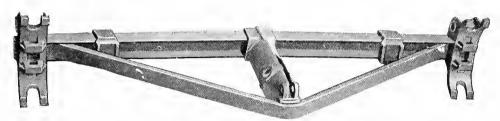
Huntoon Standard Passenger Brake Beam. Joliet Railway Supply Co.
